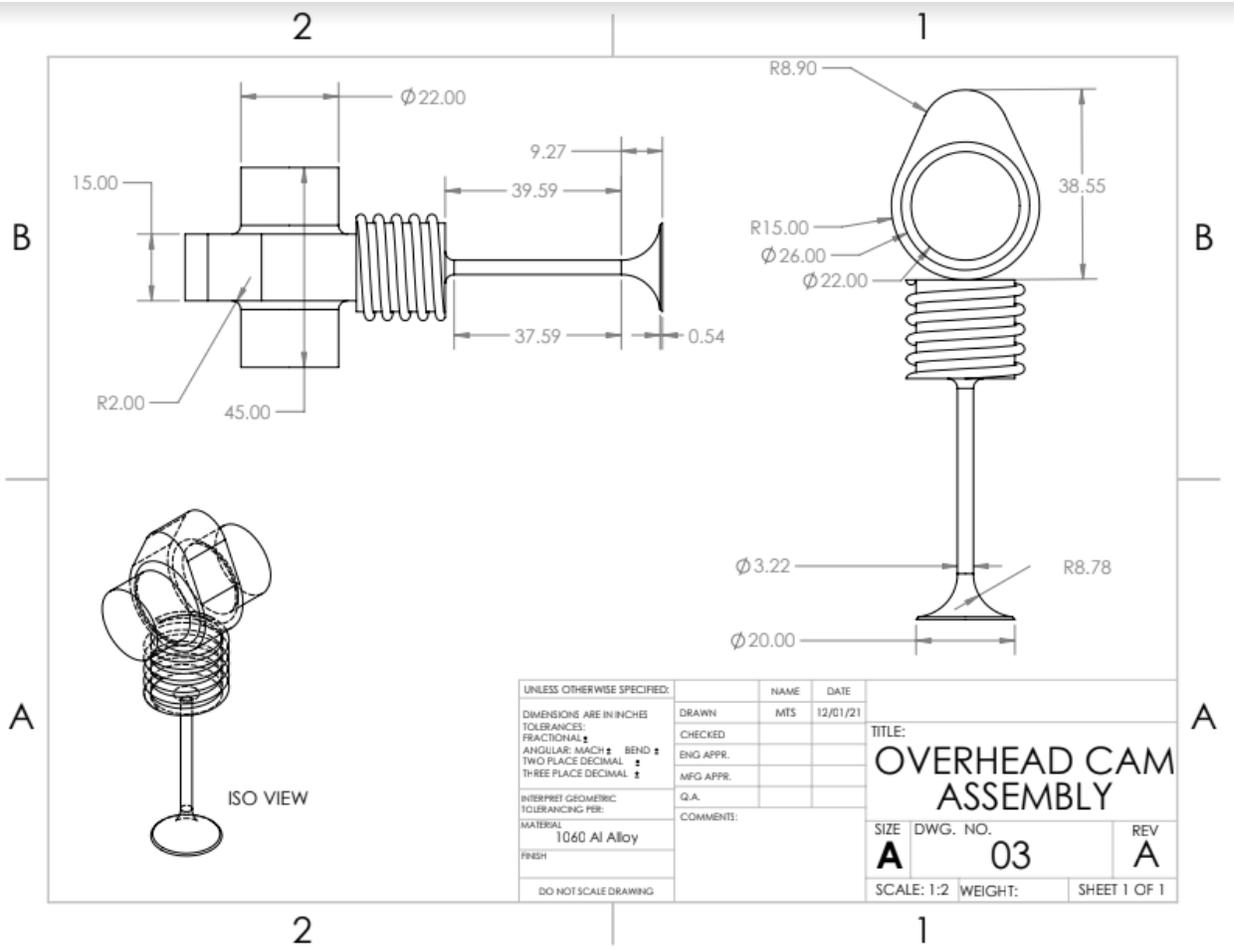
This schematic shows a preliminary direct overhead cam-valve assembly that the team designed and briefly pursued for analysis.
